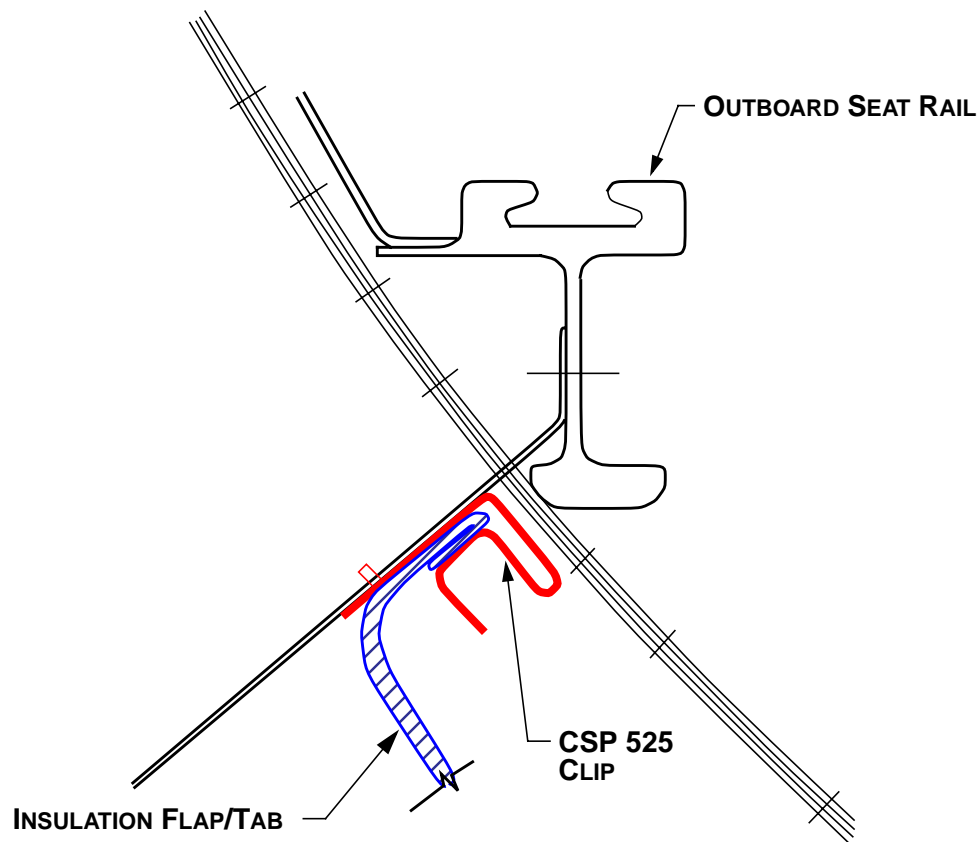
CSP 525-1 RETAINING CLIP INSTALLATION (UNDERFLOOR STRUCTURE)
